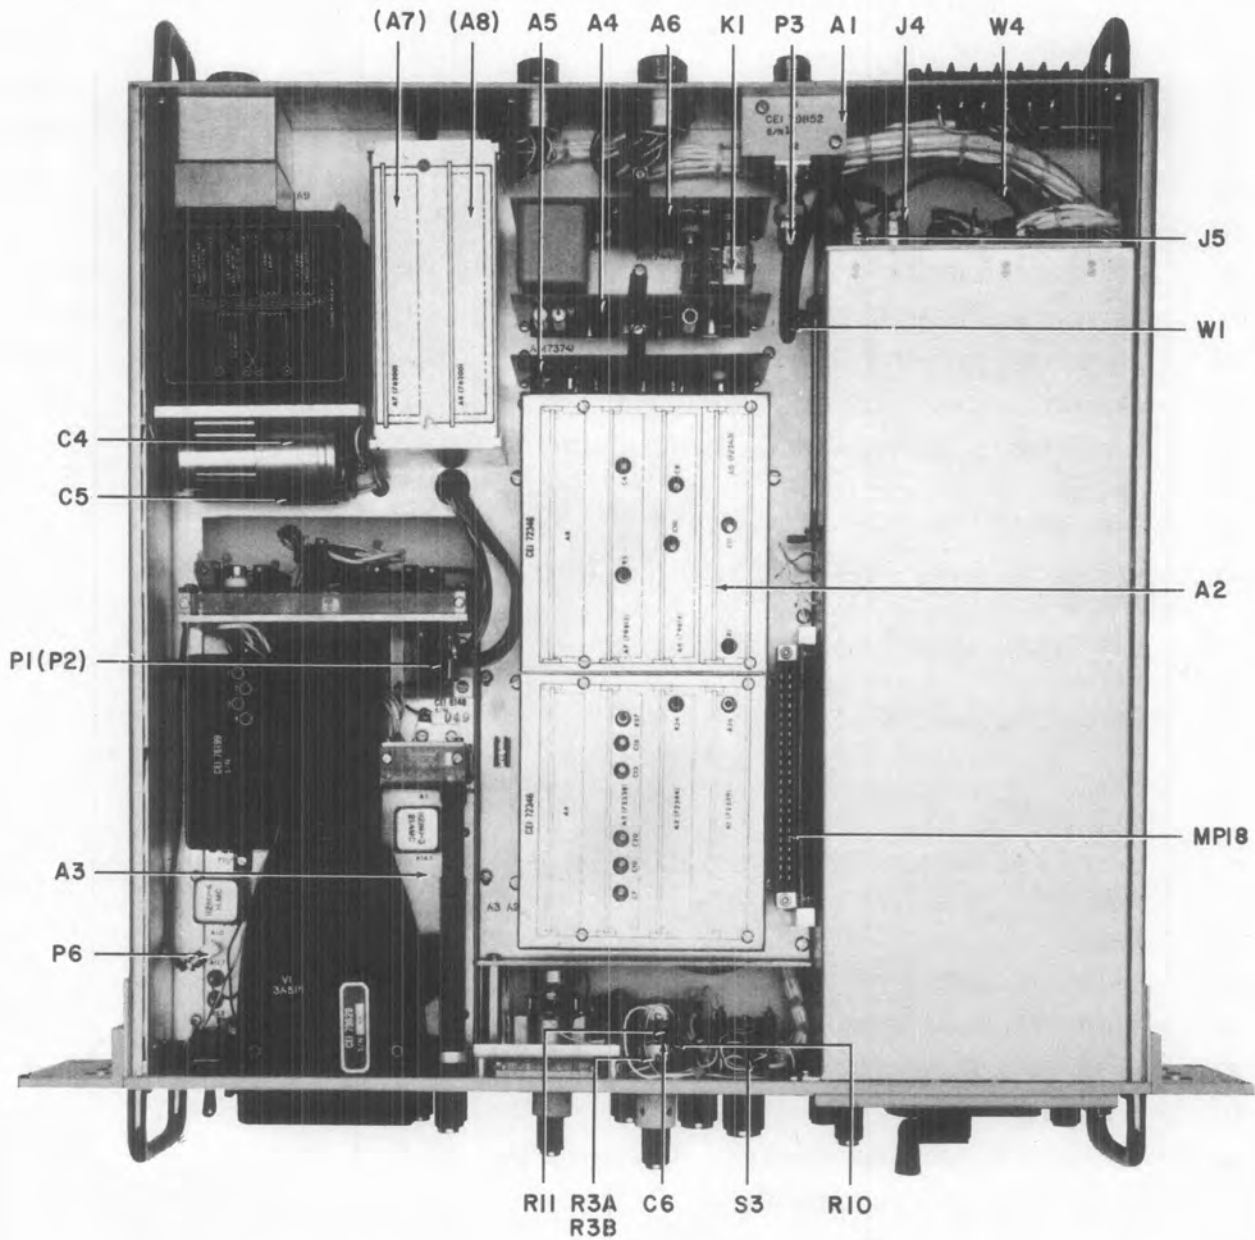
Type 560 Receiver, Top View, Component Locations
